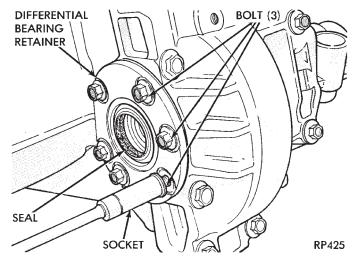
Remove or Install 3 Differential Bearing Retainer Outer Bolts
